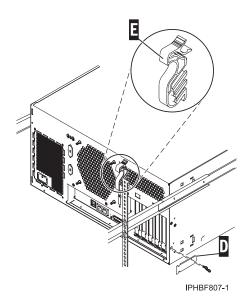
Securing the system to the rails and removing the rack-support wheels.
